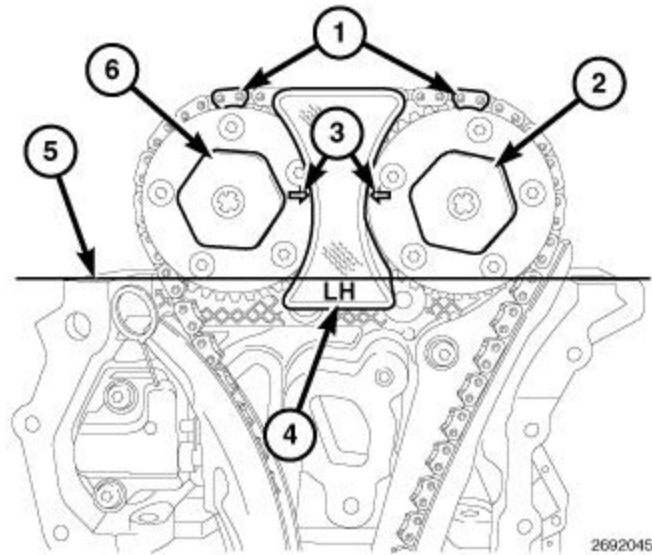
Phaser Timing Marks, Oil Control Valves & LH Camshaft Phaser Lock
